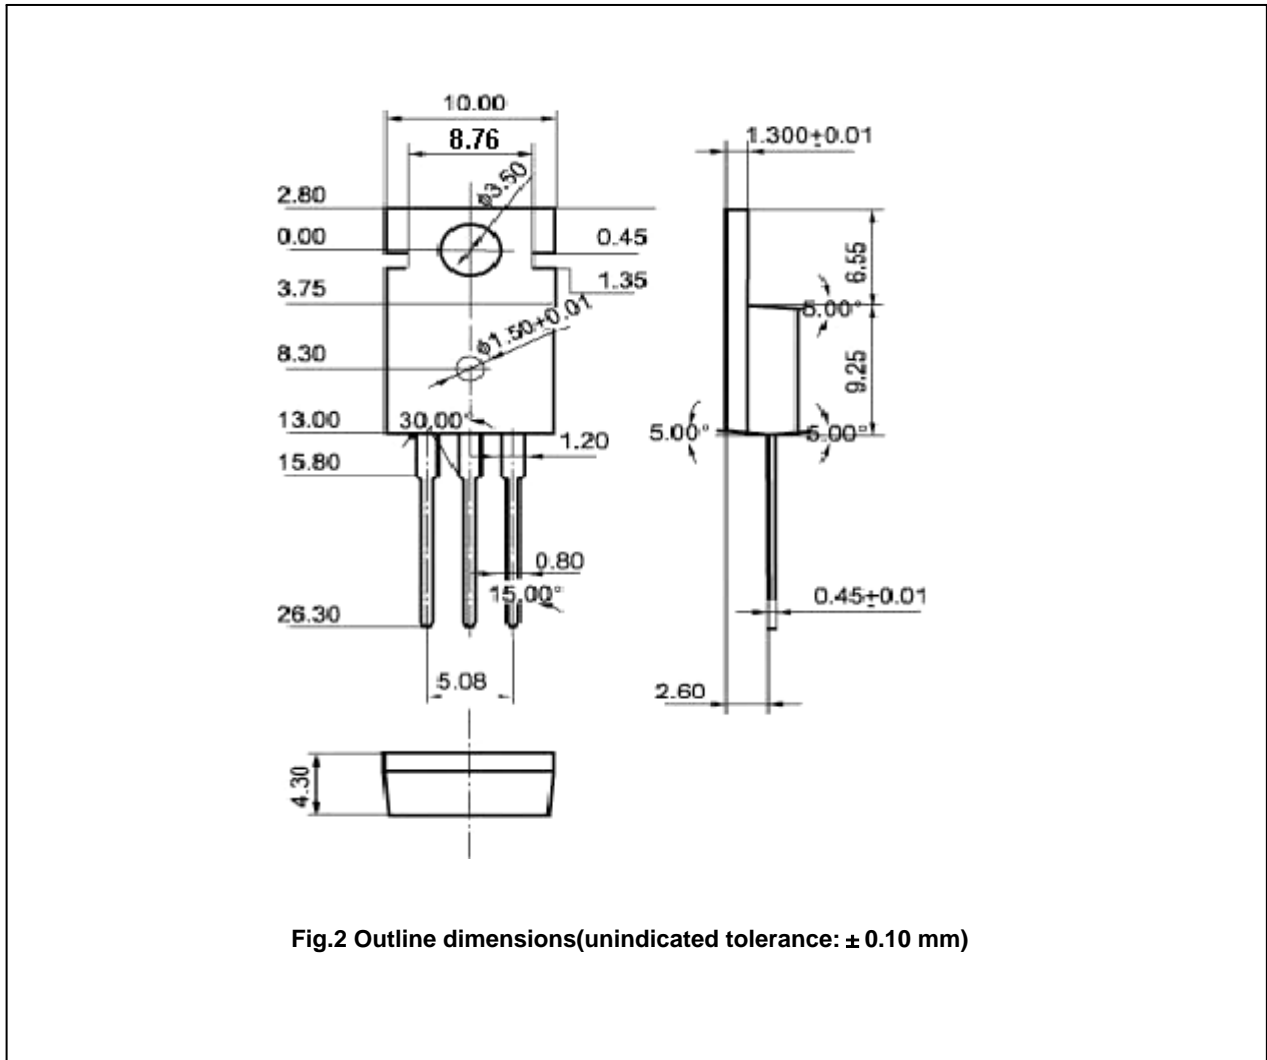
Outline dimensions(unindicated tolerance:  $\pm 0.10$  mm)
